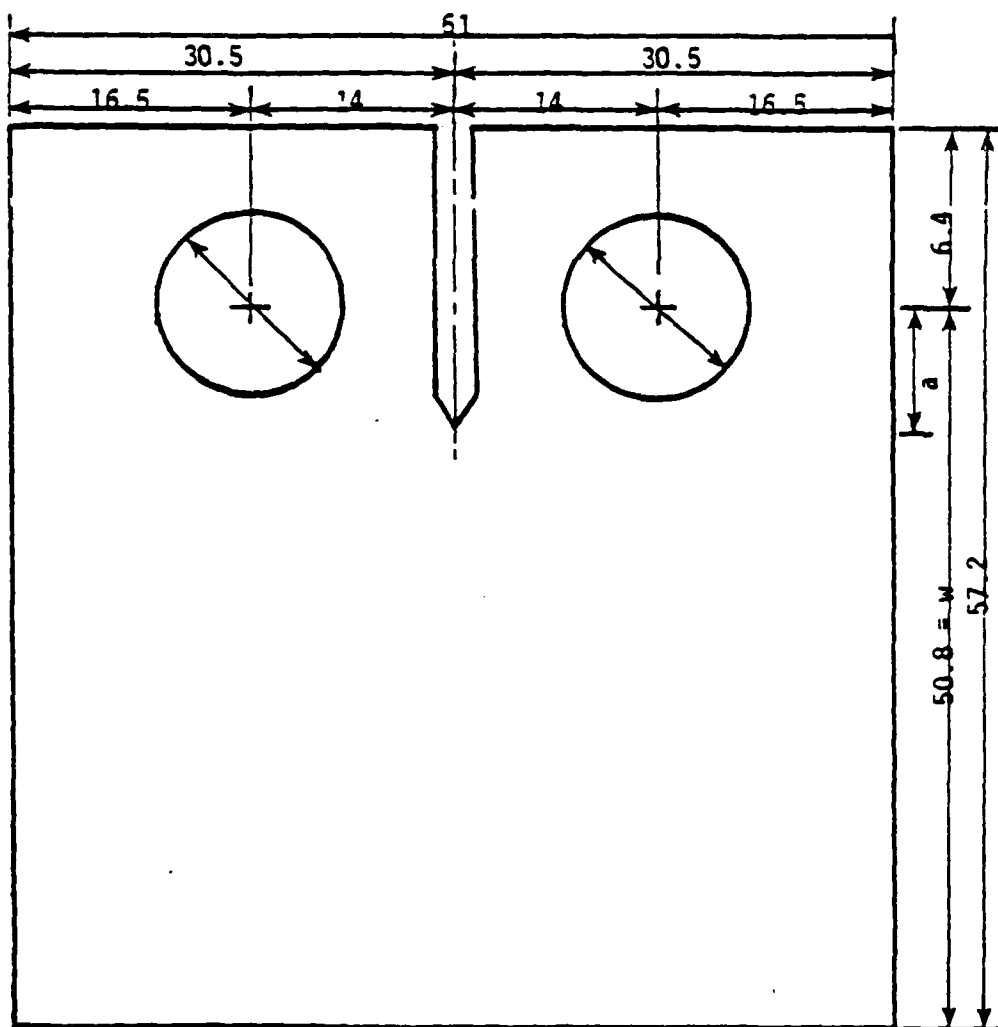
Scale drawing of compact tension specimens used in this study, with dimensions in mm.
